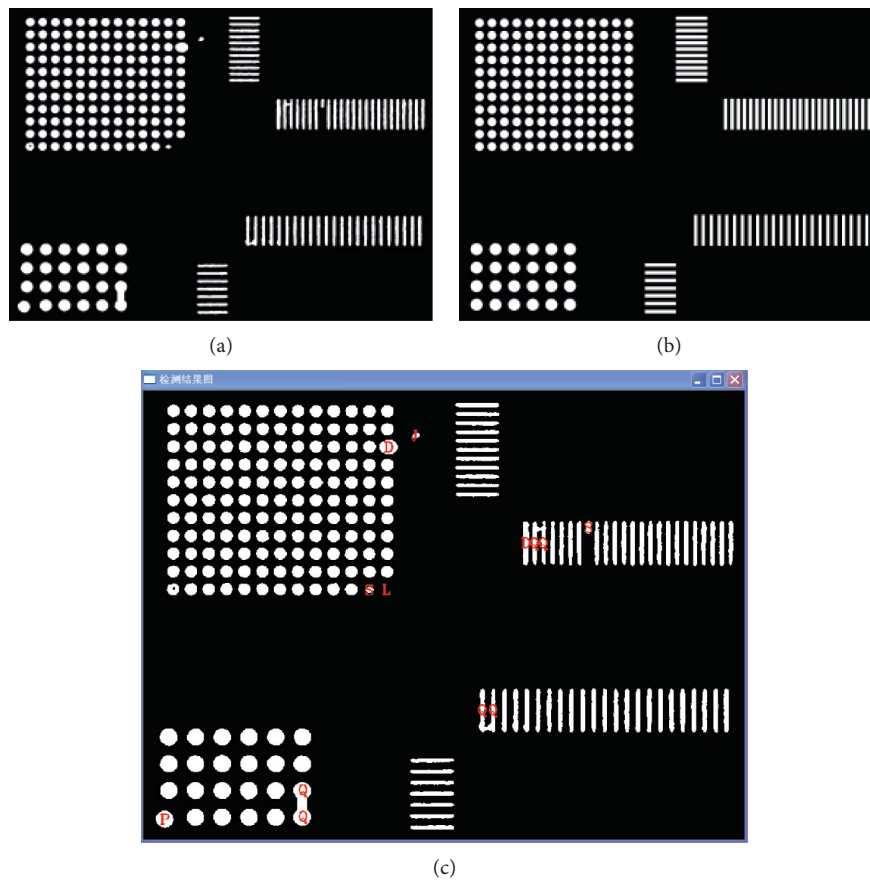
(a) Solder paste image to be inspected. (b) Standard image. (c) Inspection result.
